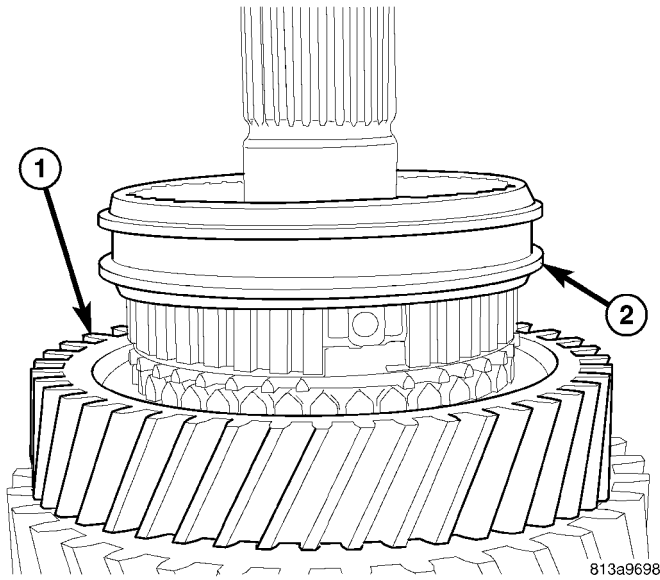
REVERSE GEAR SYNCHRO SLEEVE
